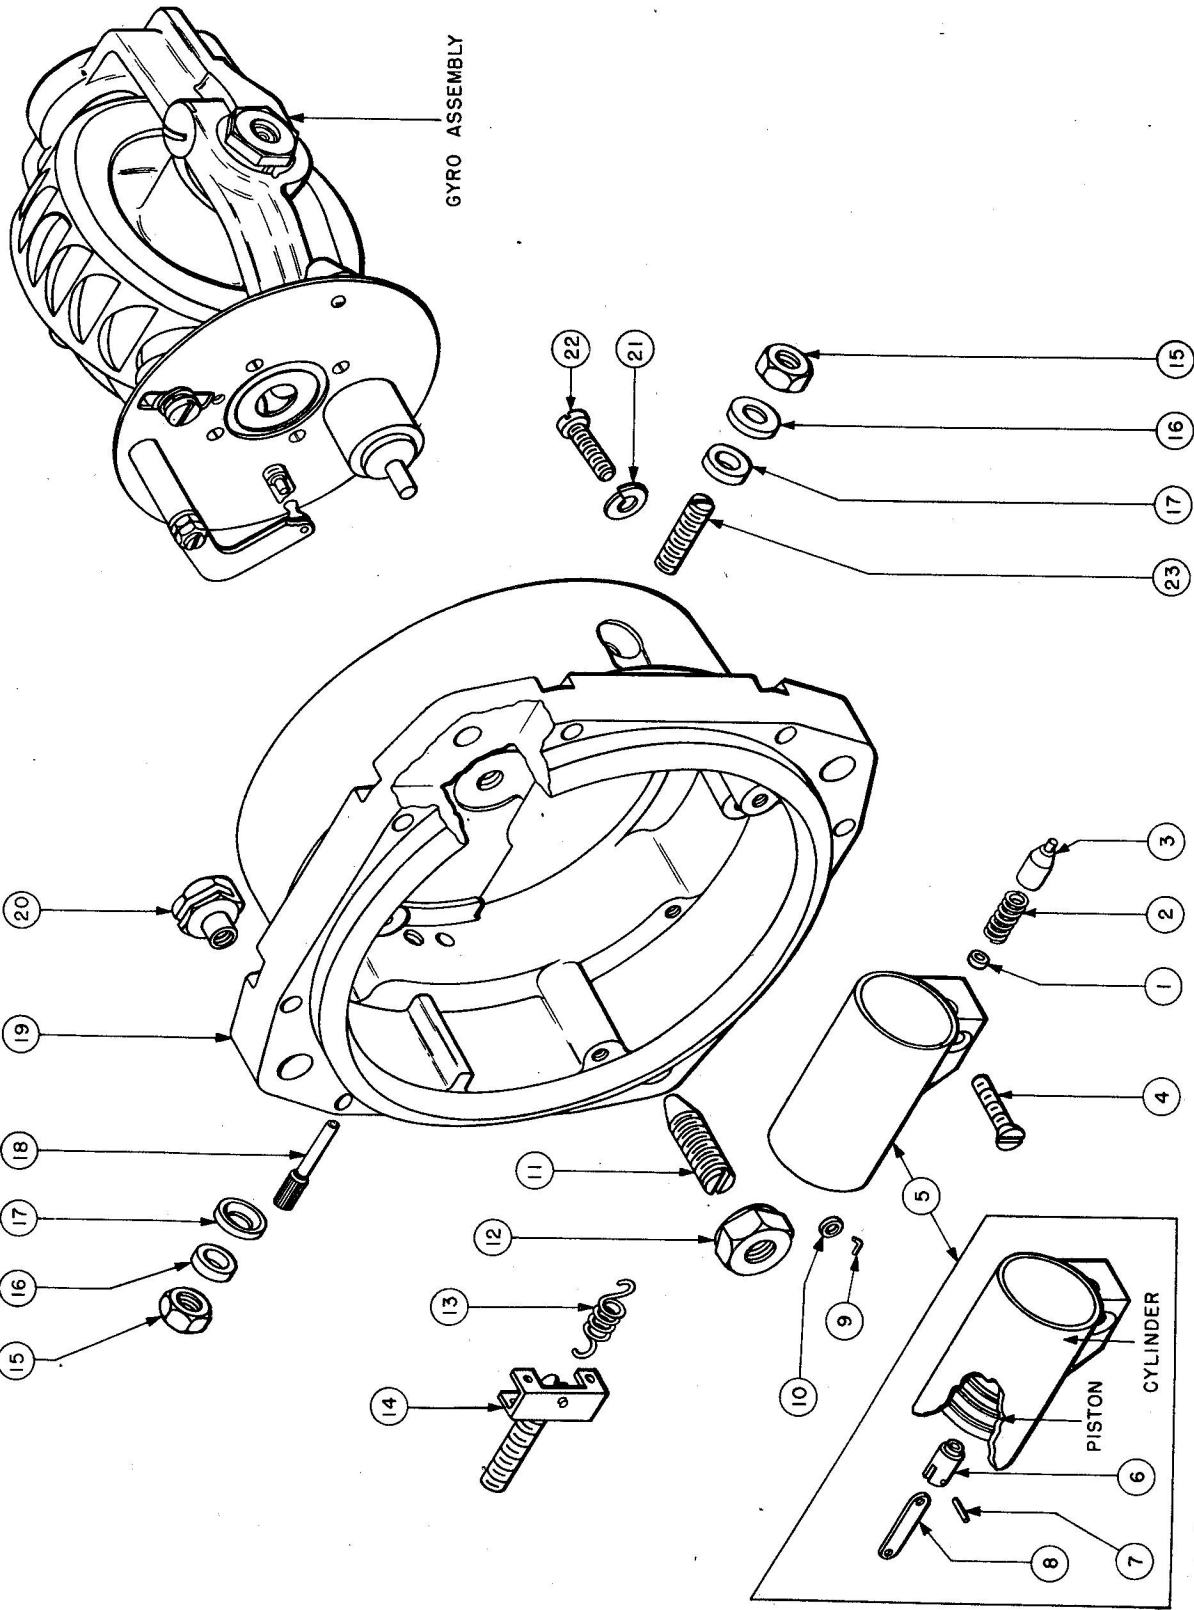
Exploded View Drawing—Front Ring Assembly—Navy Types FSSC 18-I-462 (Pioneer Type 1713-1Y-A1), FSSC 88-I-3280 (Pioneer Type 1719-1AF-A1), and FSSC 88-I-3281 (Pioneer Types 1719-1AN-A1 and 1719-1AQ-A3).
